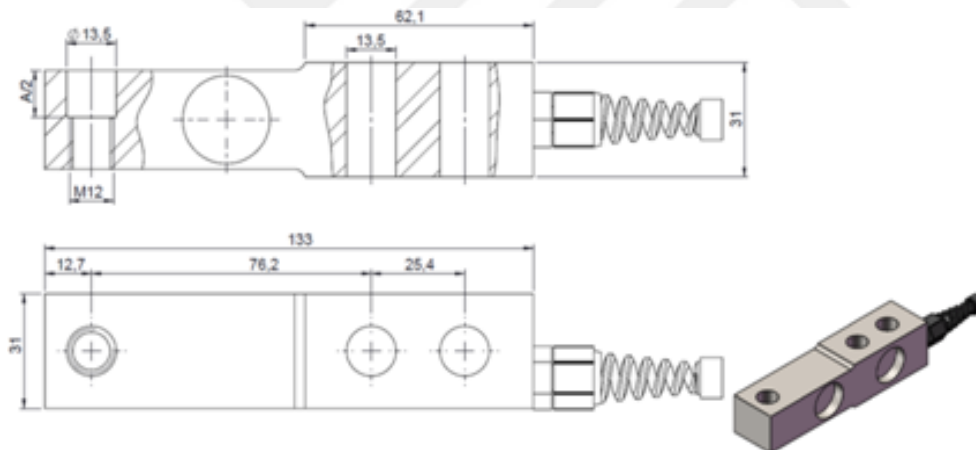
Technical Drawing of Load Cell (Dimensions are in mm)
